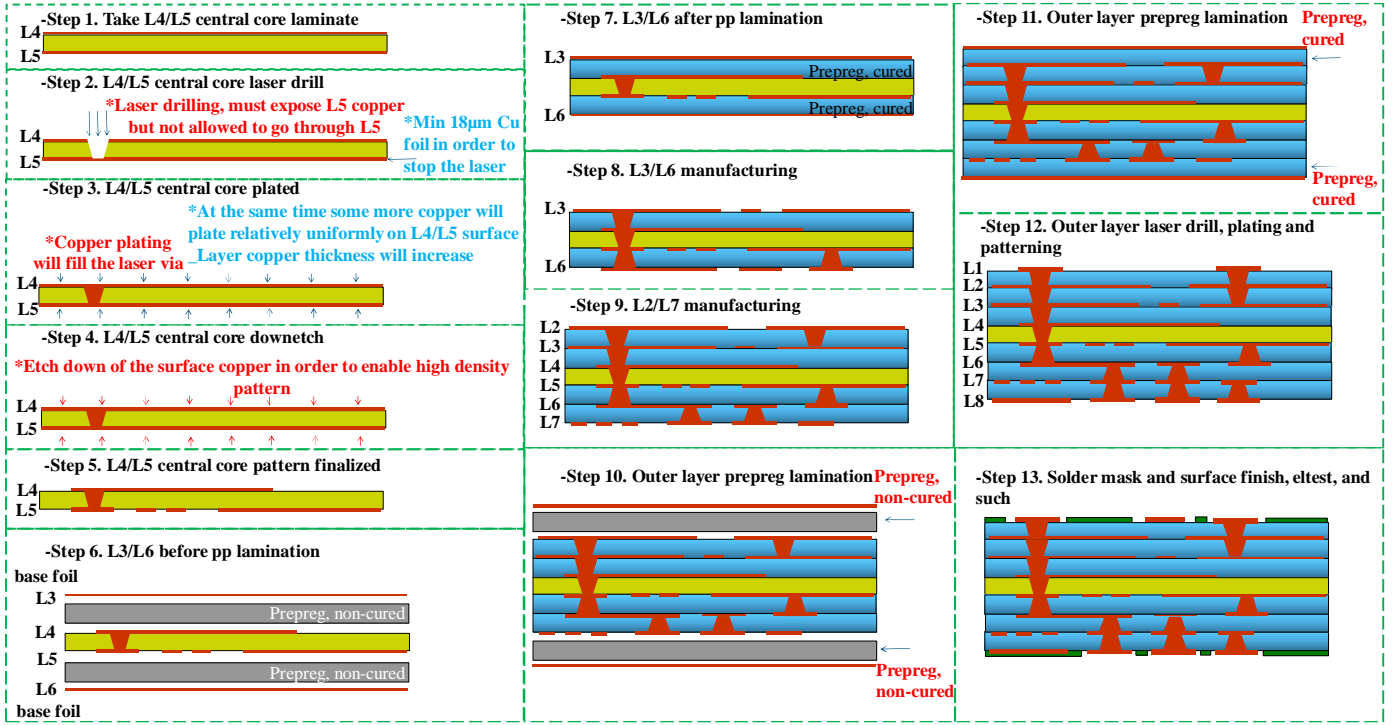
13 steps in fabrication process of "Any-Layer PCB Technology" [21].
